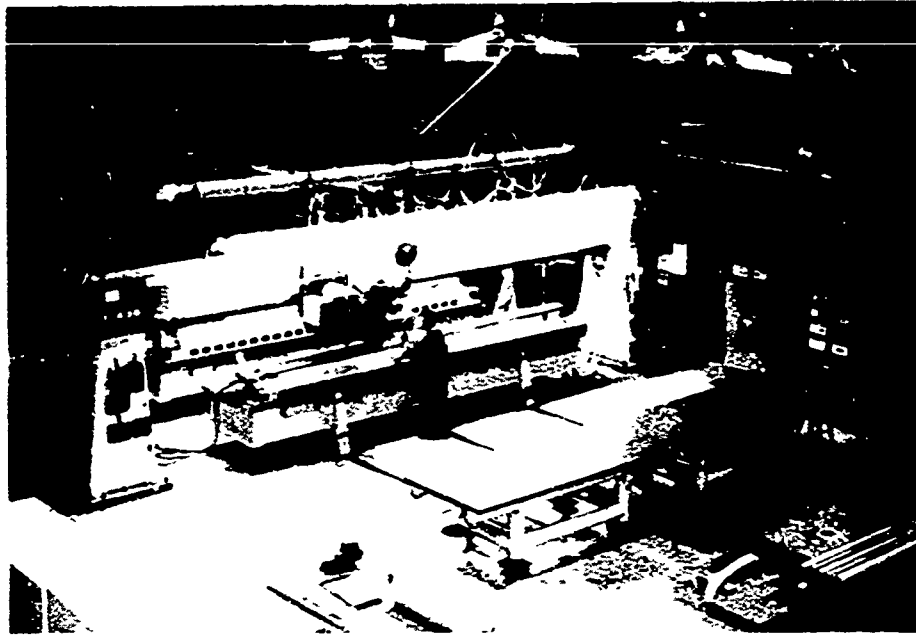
GENERAL VIEW OF THE SINE-WAVE WELDING MACHINE (REF. 54)
